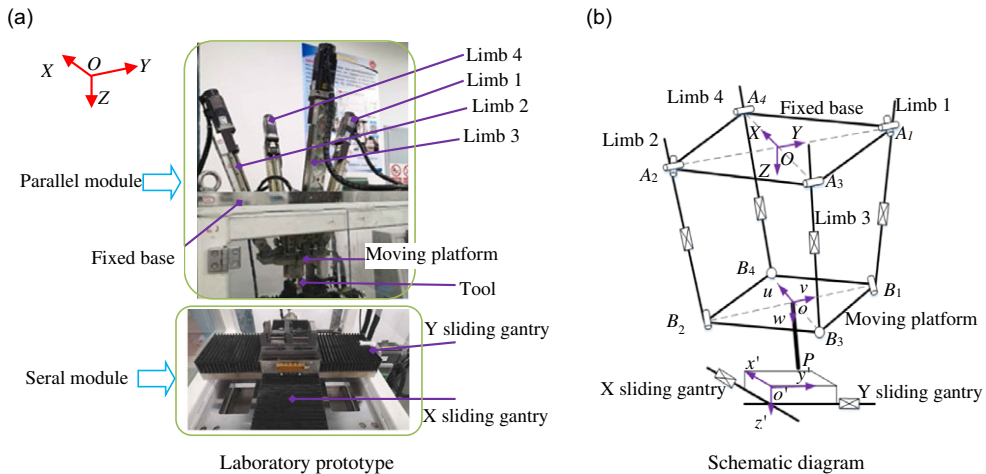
Laboratory prototype and schematic diagram of the hybrid machine tool.
